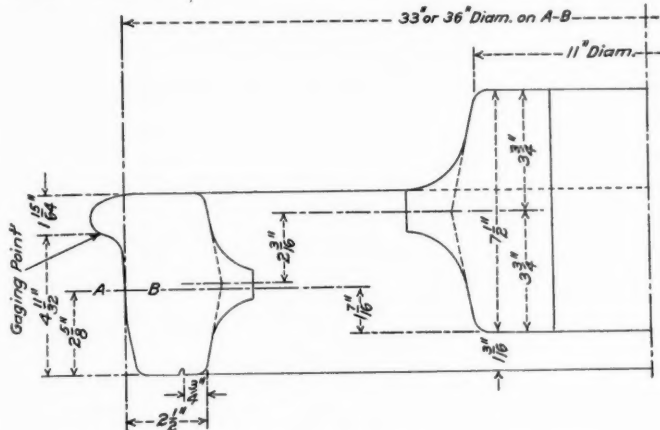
Solid Steel Wheels for 6 in. x 11 in. Axles.
